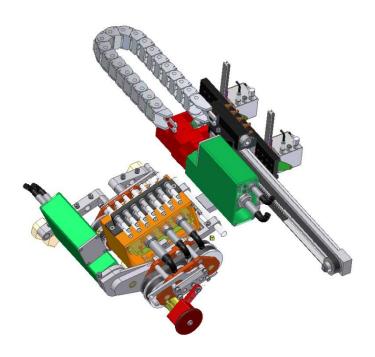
HRID SPH Piping Circumferential Welds inspection scanner
